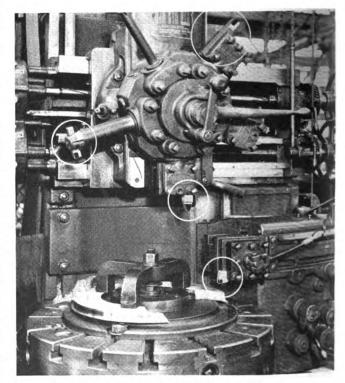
Carbide-tool installation on a Bullard vertical turret lathe for machining driving-box hub plates—A special fixture is used for holding the work on the table
